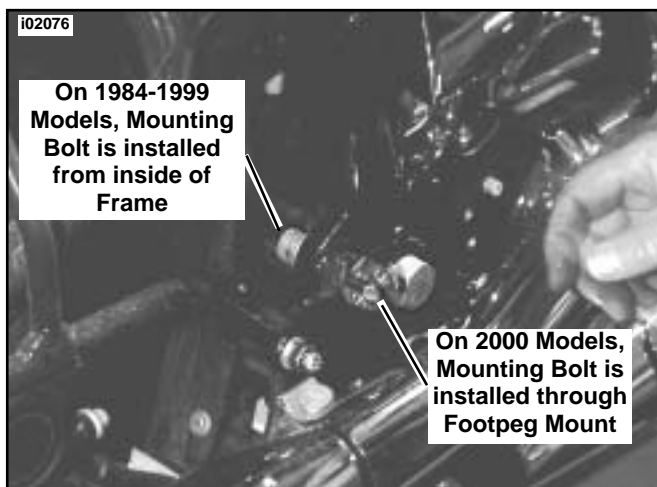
Remove Passenger Footpegs and Existing Saddlebag Supports
